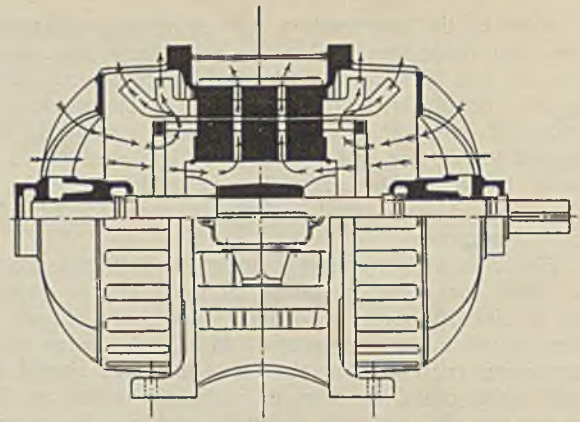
Sectional Drawing of Ribbed Frame Protected Enclosed Motor.
